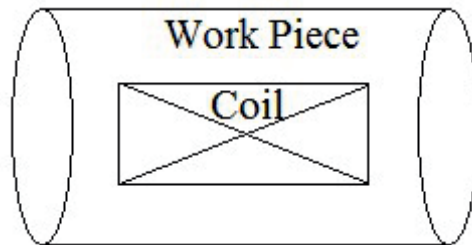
Magnetic Pulse Expansion Welding.
